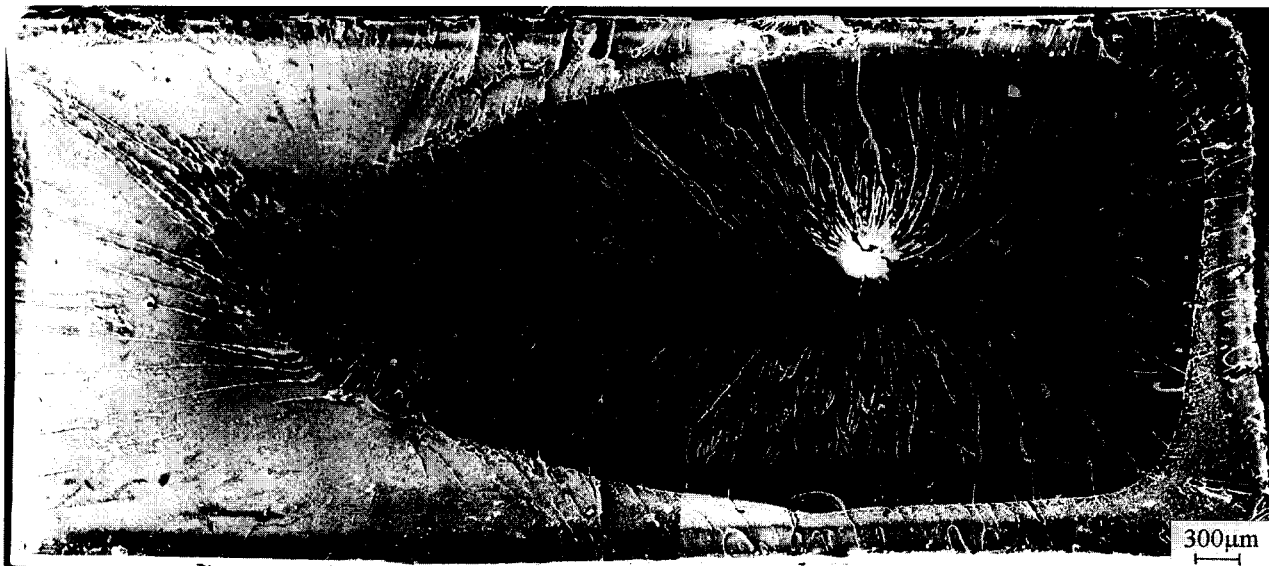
Fatigue fracture surface of injection moulded PEK-C,  $S_{max} = 0.5 UTS$ ,  $R = 0.3$
